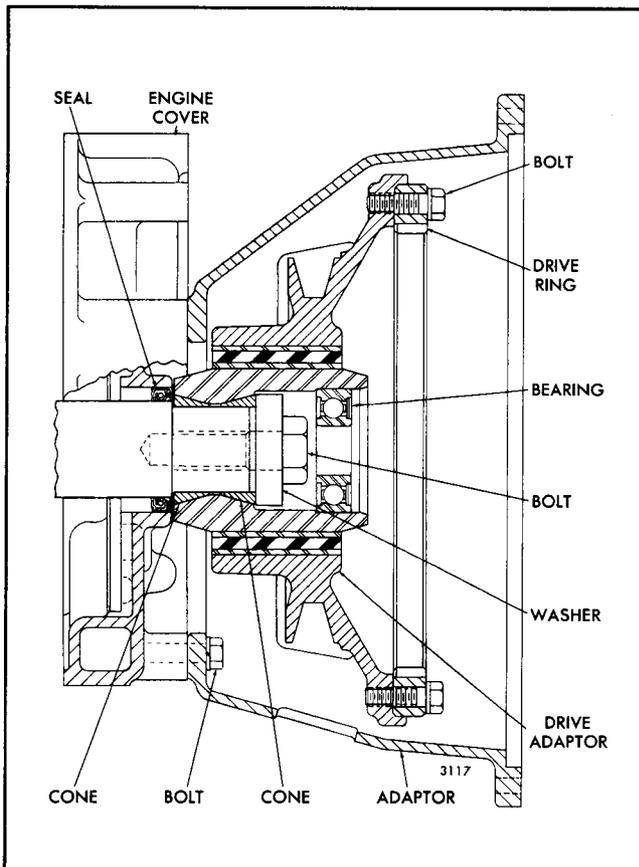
Front Power Take-Off Adaptor and Drive Mechanism
